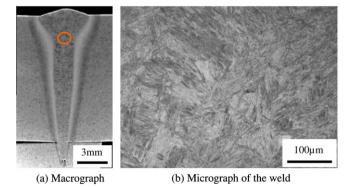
Microstructures of a CLAM steel joint produced by Electron Beam Welding.
